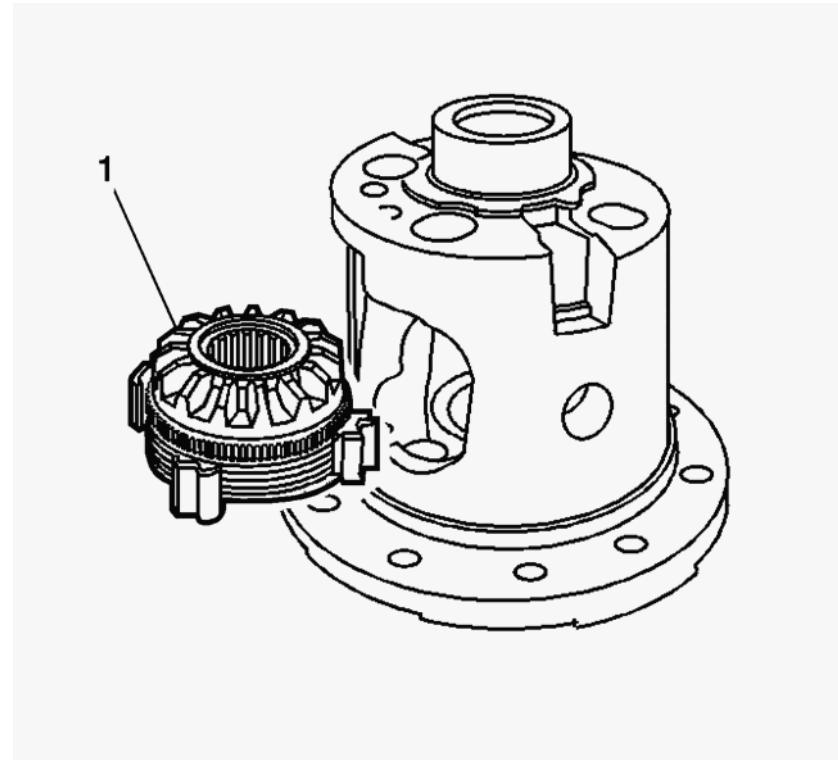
Left Side Gear Cam Unit And Clutch Disc Assembly
